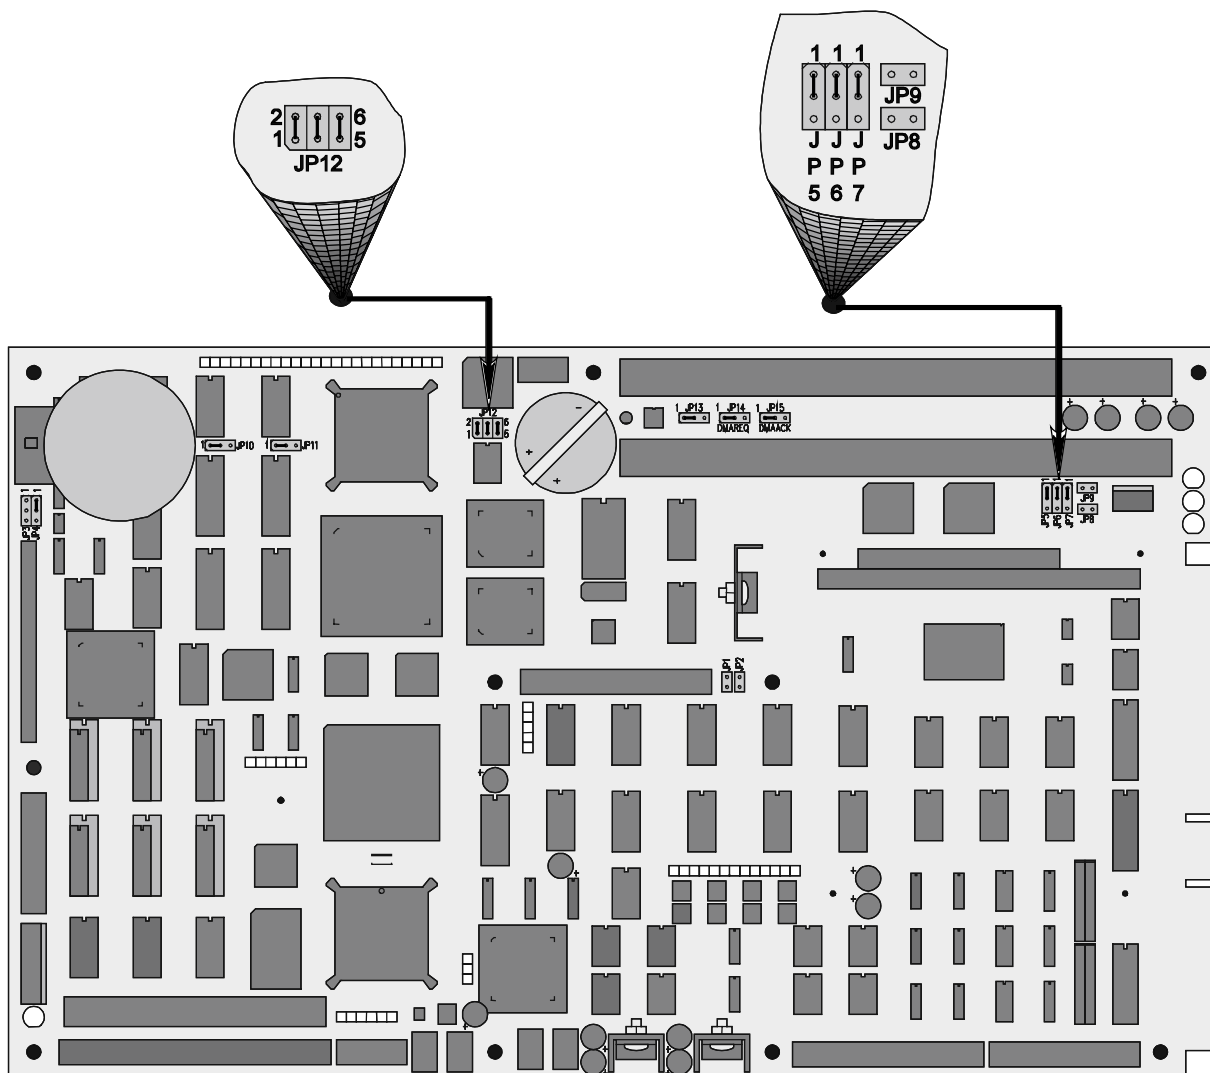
Control Board Showing Locations of User Configurable Jumpers
